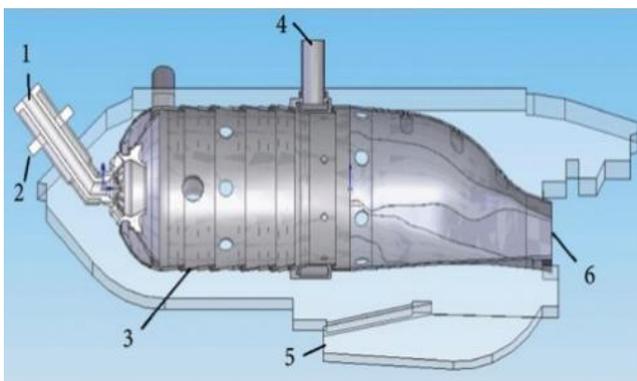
Combustion chamber of an "Aquarius" type gas turbine set with steam injection: 1 – fuel supply; 2 – side steam injection; 3 – flame tube; 4 – main steam injection; 5 – air supply after high pressure compressor; 6 – gas outlet to turbine [32]
